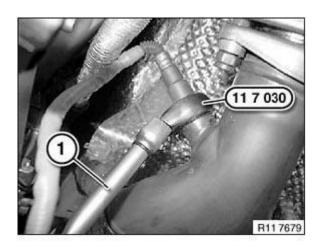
Securing Oxygen Control Sensor With Special Tool (11 7 030) And Torque Wrench Courtesy of BMW OF NORTH AMERICA, INC.
